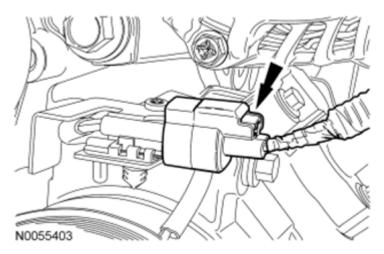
Locating Generator B+ Cable Courtesy of FORD MOTOR CO.
